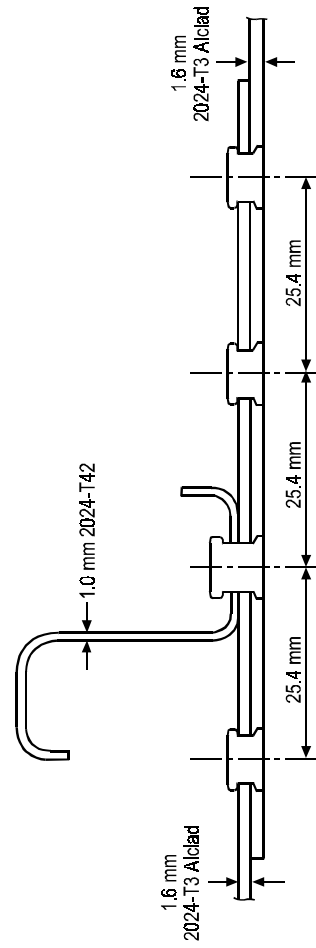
Configurations of the cracked lap splices looking FORWARD
